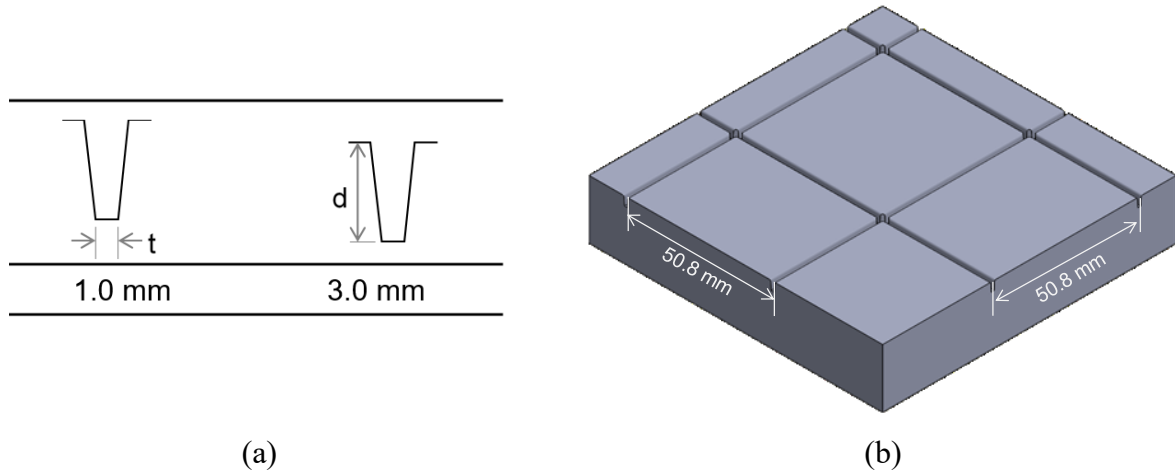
Ribs tested for warpage mitigation showing (a) dimensions and (b) placement within mould.
